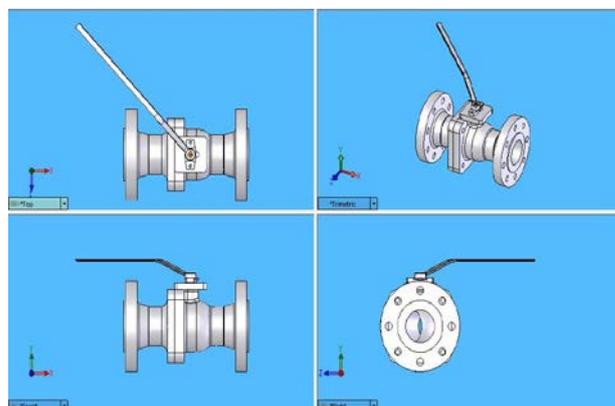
Top view, Front view, Right side view & Trimetric view of 4" 600# Ball Valve
